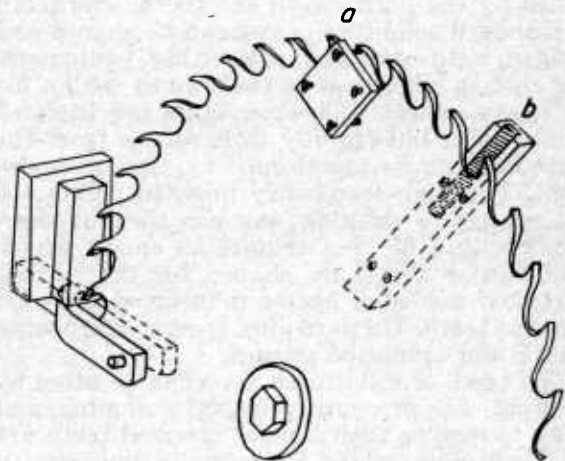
Tools for alining a saw, including, a, side gage; b, side dresser; and c, jointer.
